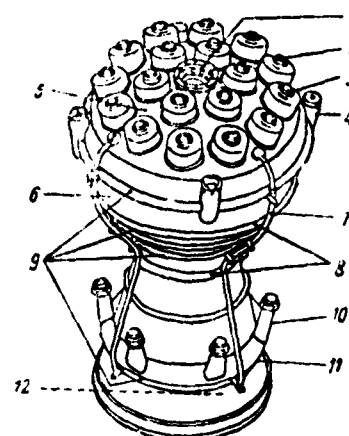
External appearance of chamber of A-4 engine. 1) Flange for attachment of main alcohol valve; 2) oxygen nozzle; 3) pre-combustion chamber; 4) mounts; 5) chamber head; 6) combustion chamber; 7) cooling-system pipeline; 8) corrugations to offset thermal expansion of chamber outer shell; 9) rings for alcohol supply to chamber; 10) connecting pieces for delivery of ethyl alcohol into space between tanks; 11) fuel-collector ring; 12) boundary of cooled section of nozzle.
